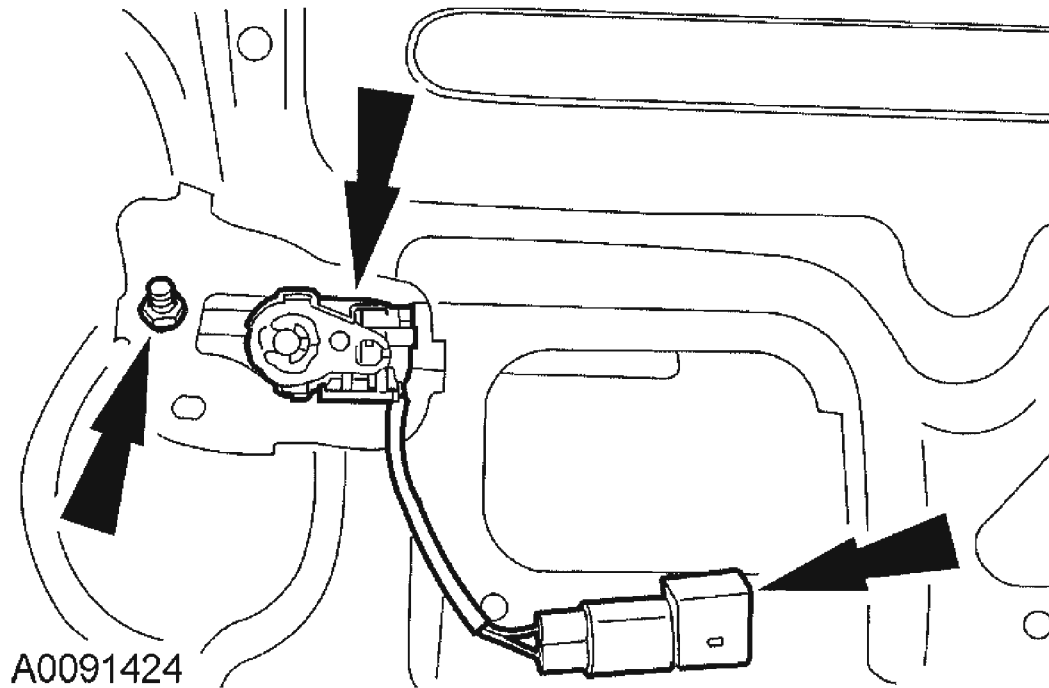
Detaching Electrical Connector, Removing Nut And Luggage Compartment Lid Lock Cylinder
